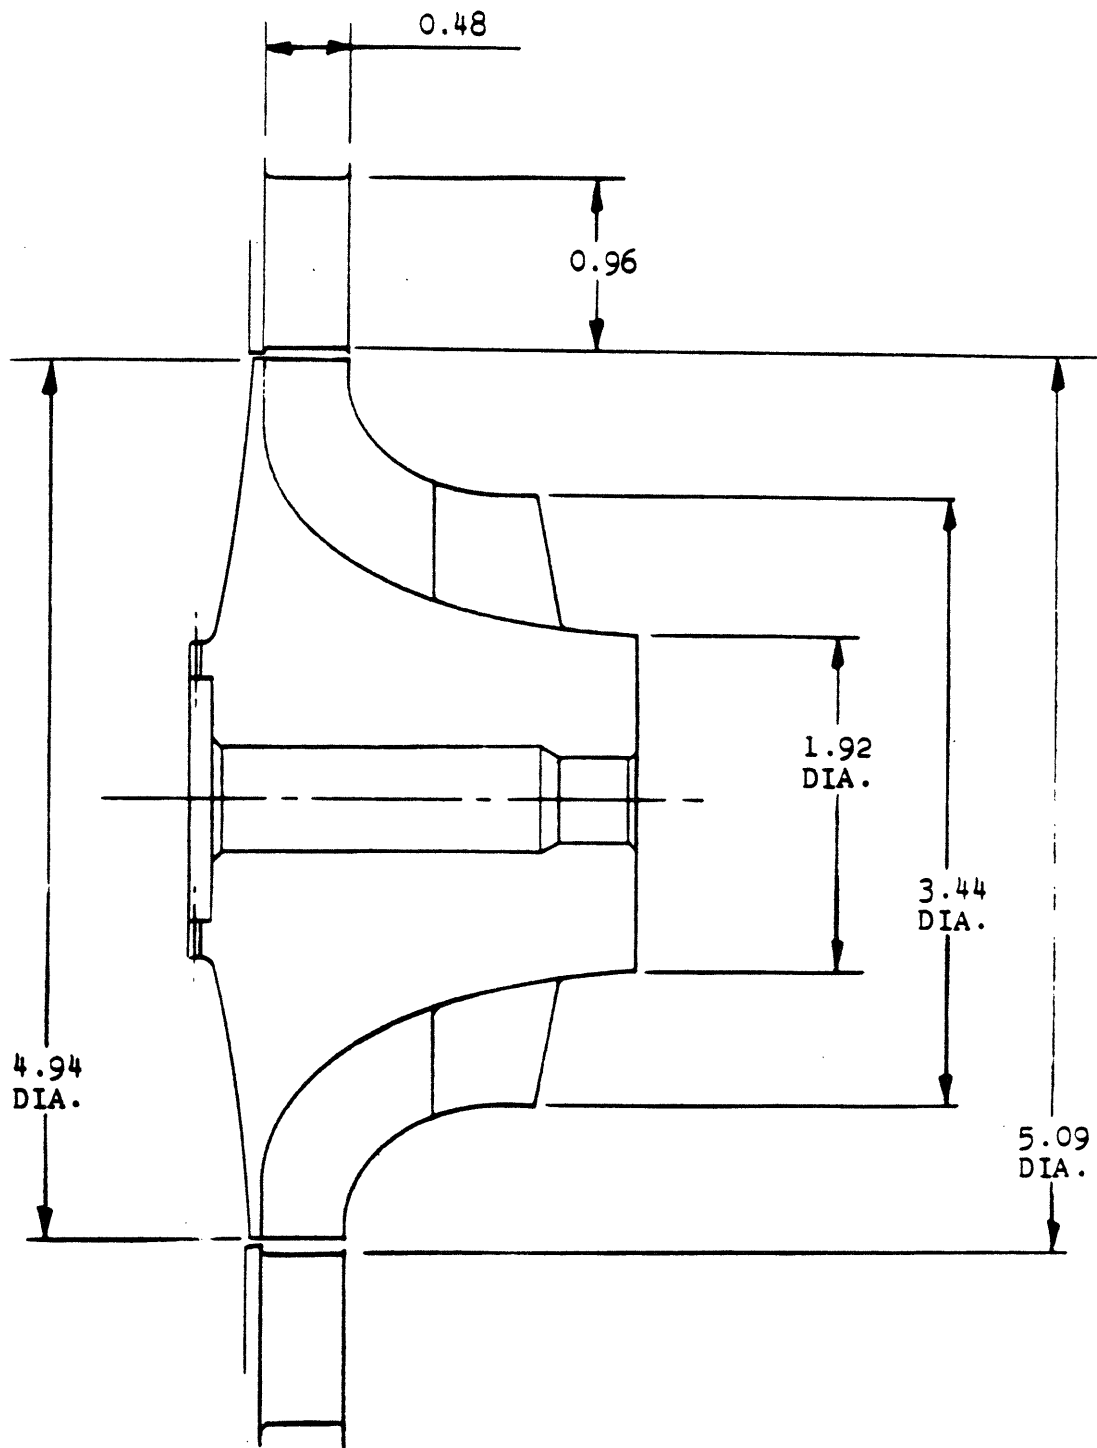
Brayton Rotating Unit Turbine Design.
